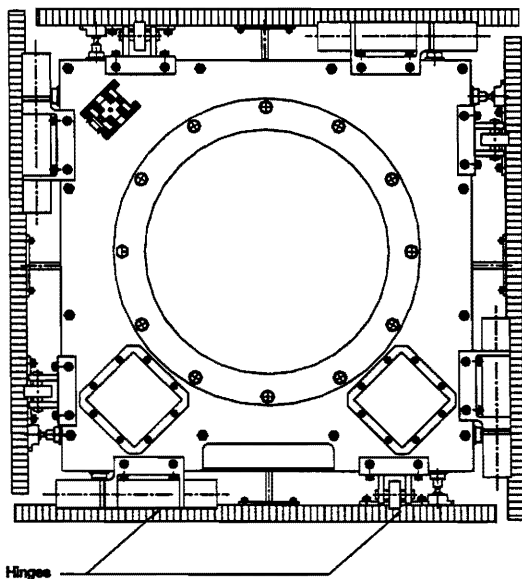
SACI-1 bottom side showing the hinge assembly and interface to the Adapter.
